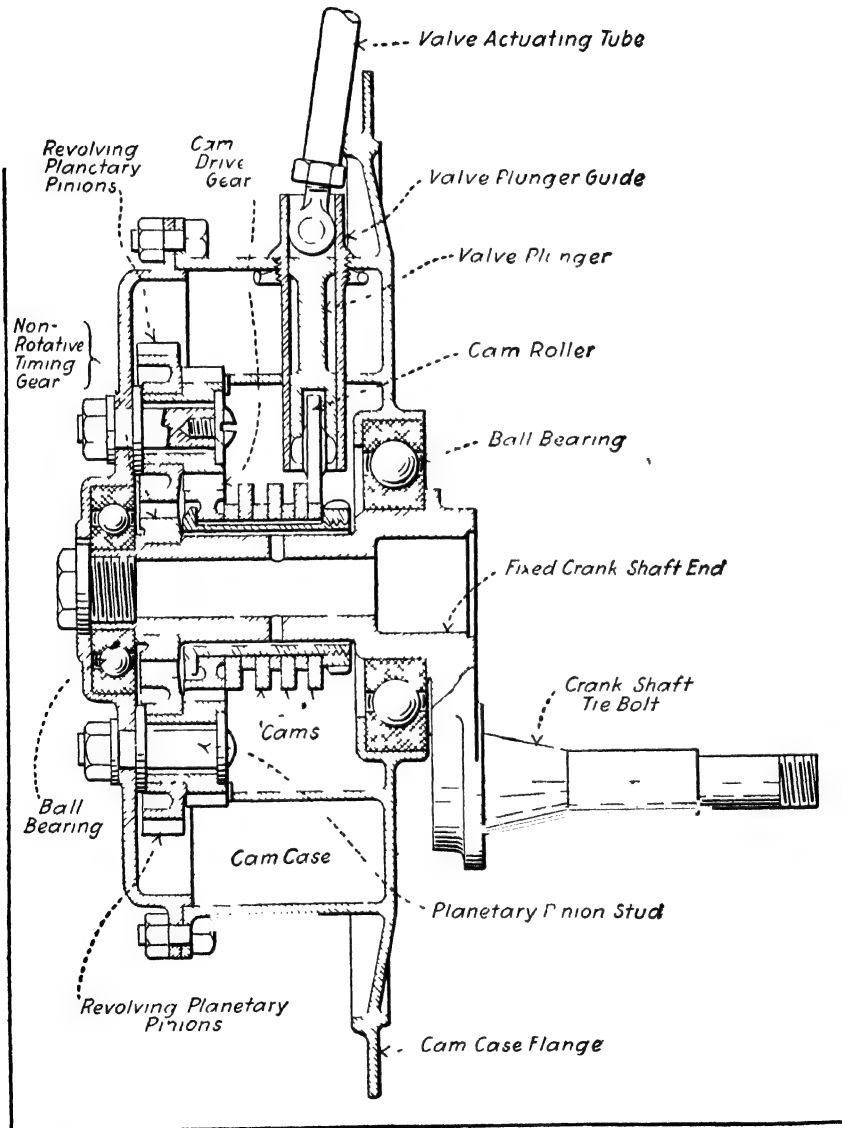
Cam and Cam Gearcase of the Gnome Seven-Cylinder Revolving Engine Showing Method of Driving Cams and Cam Follower Construction.
